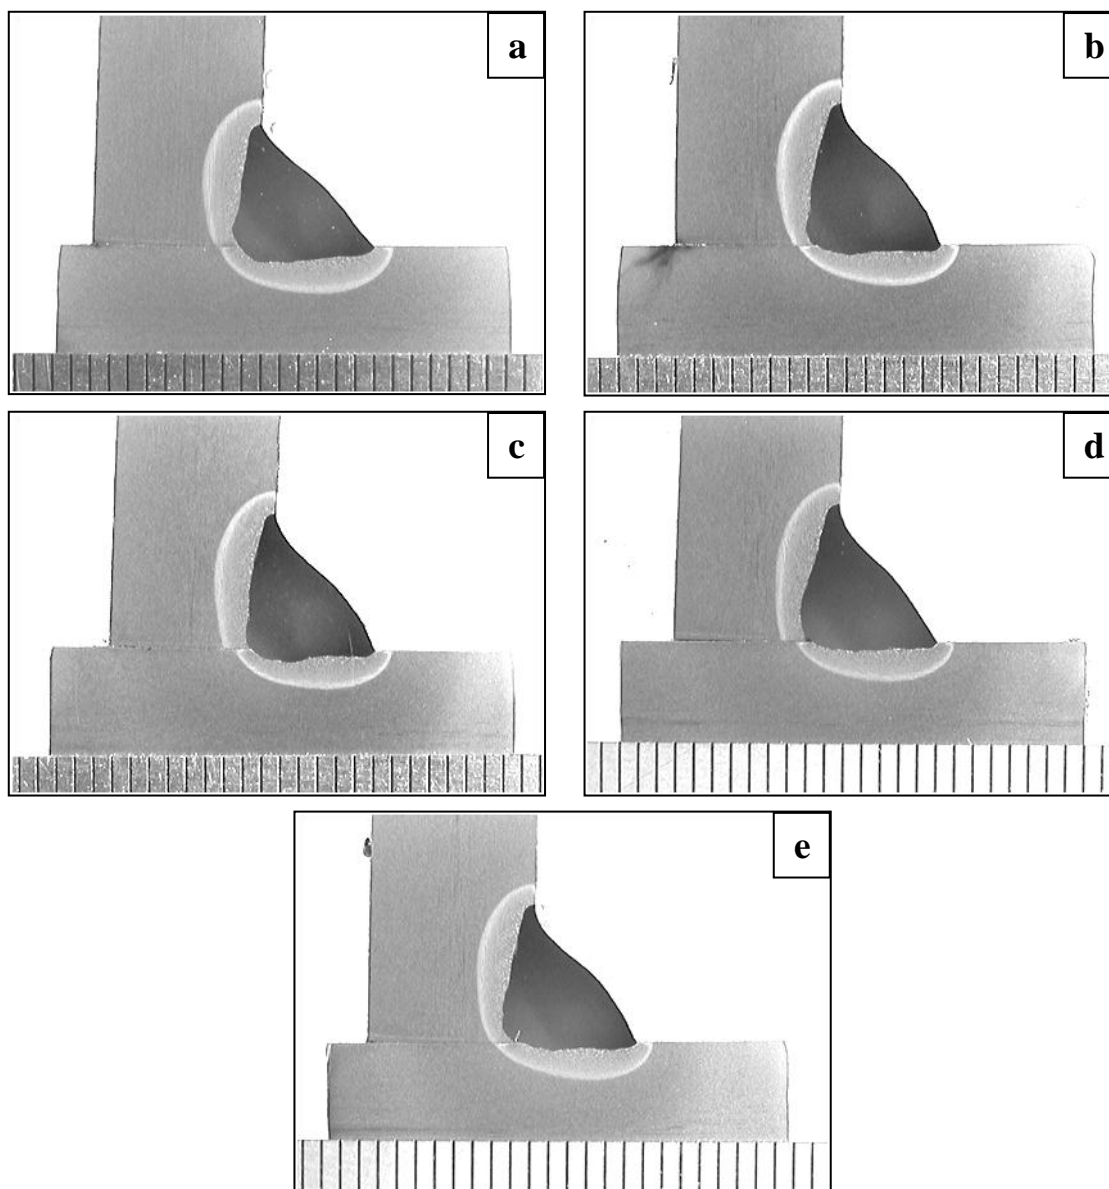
Macrophotographs of the 1 pass fillet welds deposited with flux-cored consumable under various preheat conditions; a - 80°C PH, b – 60°C PH, c - 40°C PH, d - Ambient (22°C) PH, e - 7°C PH. Note: scale is in millimetres.
